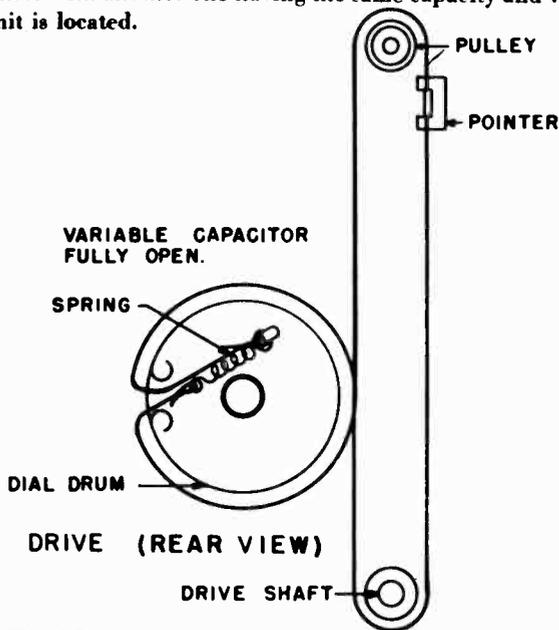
DIAL CORD DRIVE (REAR VIEW)
